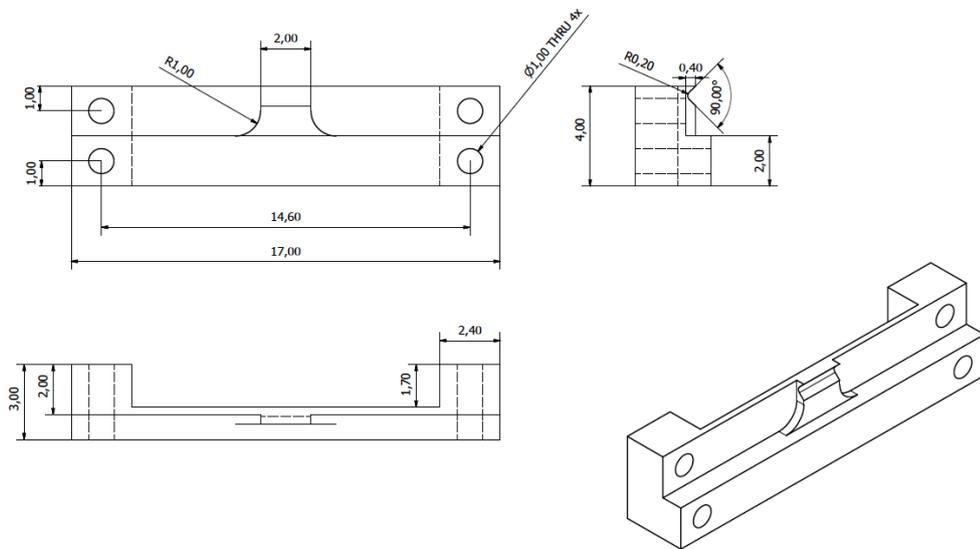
The drawing of the sample holder for the FIB milling process (1 piece). All units are mm. The material is copper. Two such holders will fit into the sample carrier provided by ScopeM. One can be glued onto the carrier, and the other flexible one can be fastened by the little screw on the carrier. The long edges of the chip will be clamped in the 2 mm long, 0.4 mm deep V-grooves of the two holders. The size of this V-groove is designed to guarantee that the trap electrodes and the wirebonding pads will not be touched when the chip is clamped by the holders. Copper wires are to be thread through the 4 holes at the two ends of the holder, to prevent the flexible holder from tilting when the screw is fastened. The extrusion at the lower half of the holder is also used to limit the tilting of the flexible holder.
